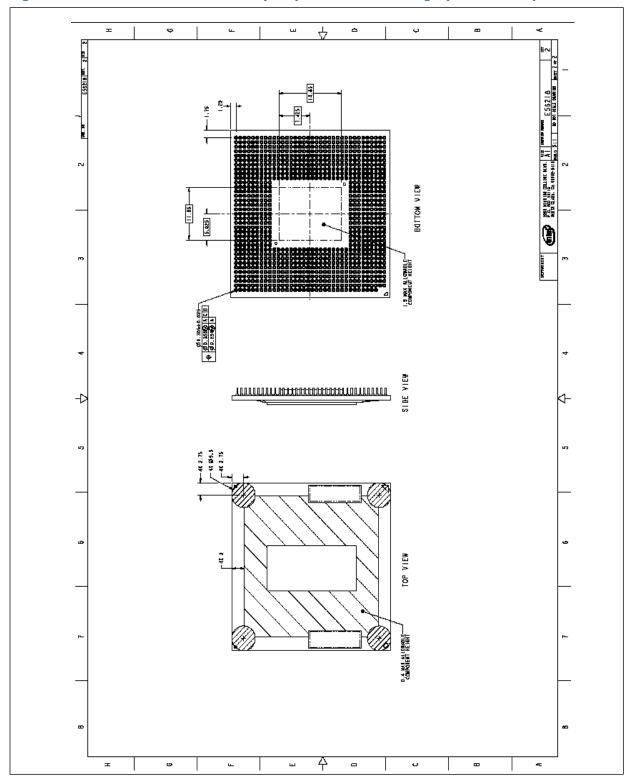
Processor BGA1023 2C (GT2) Mechanical Package (Sheet 1 of 2)
